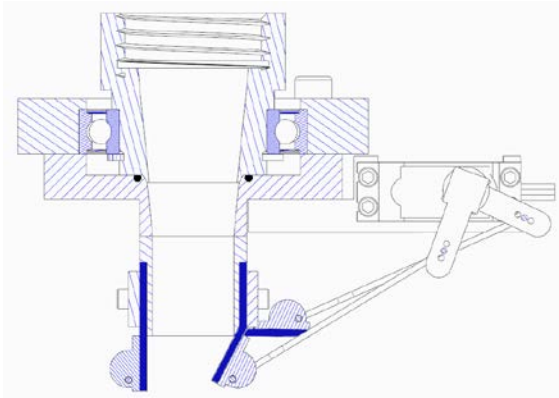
Section view of the nozzle assembly. The trowel movement is illustrated on the right trowel.
